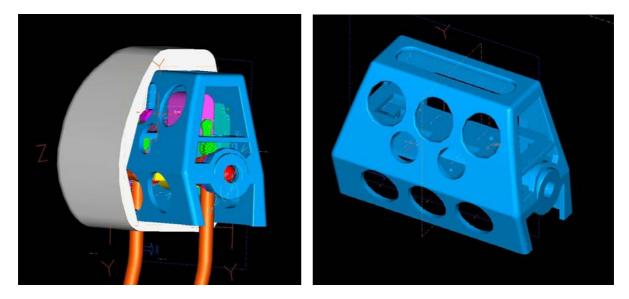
Dimensional layout – headrest detail (left), headrest shell made of composites (right)
